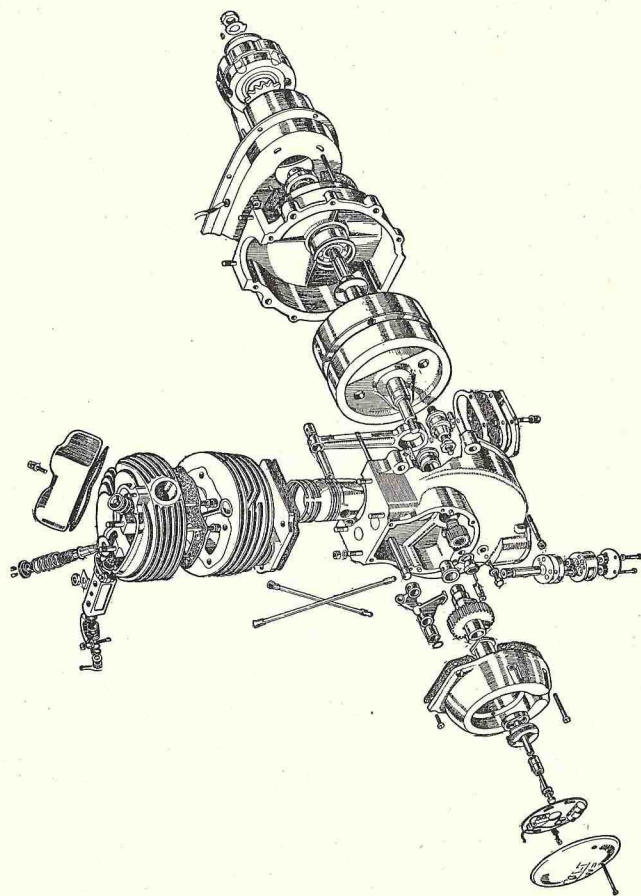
EXPLODED VIEW OF THE 200-C.C. MODEL LH COLT ENGINE.
